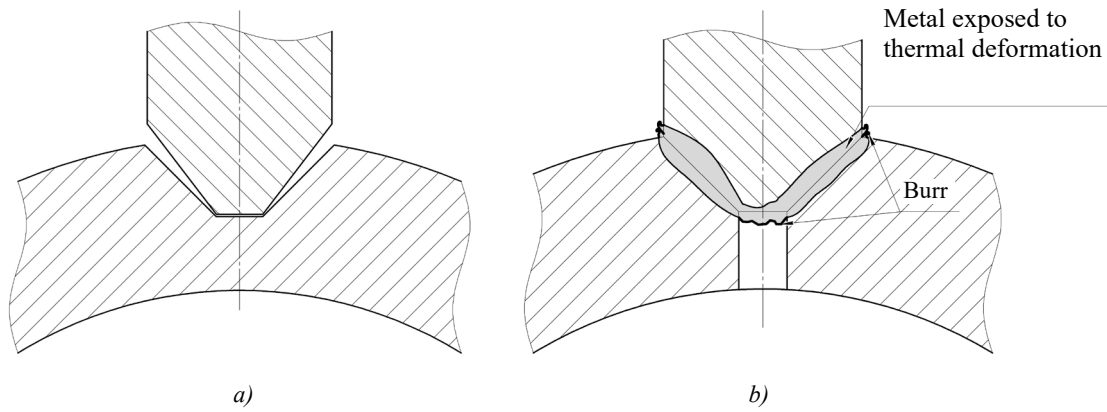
Fitting unit: *a* — shape of the contact surface; *b* — completed weld
